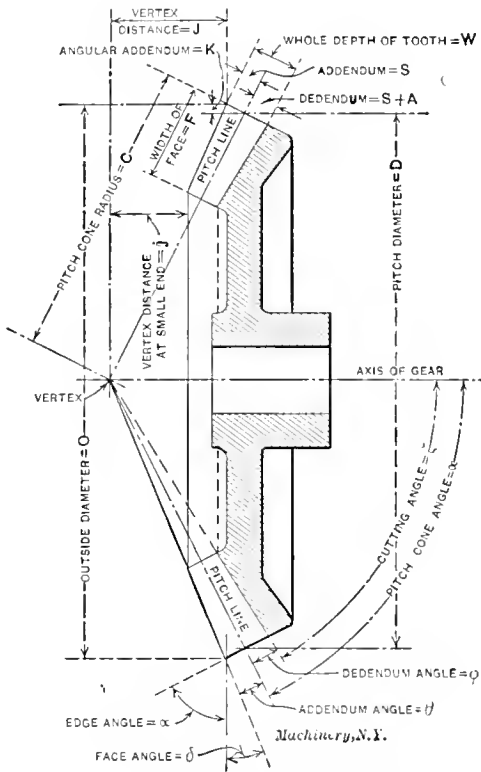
Dimensions, Definitions and Reference Letters for Ordinary Bevel Gear
